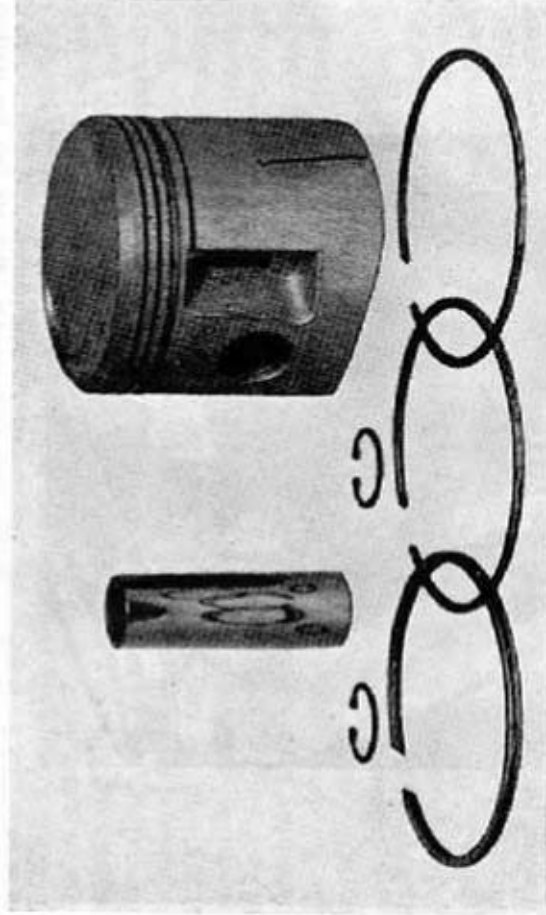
MATCHLESS 500 C.C. PISTON, GUDGEON-PIN, CIRCLIPS, AND PISTON RINGS
